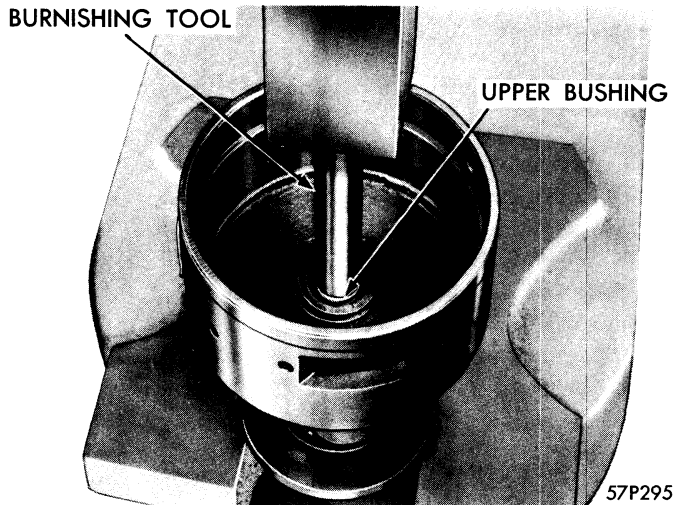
Burnishing Drive Shaft Bushings with Burnishing Tool
